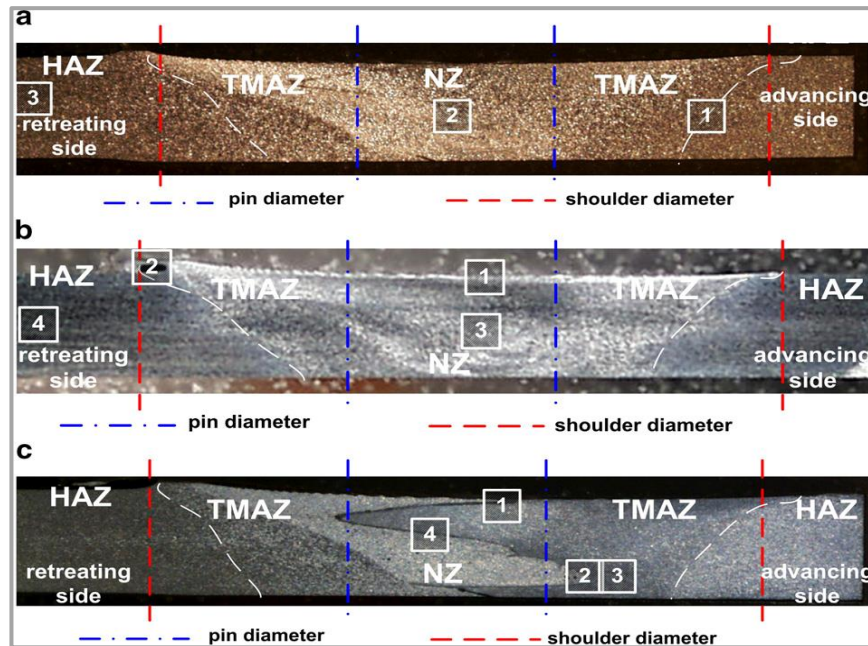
AA6082-T6+AA6061-T6 FSW welds [11]
